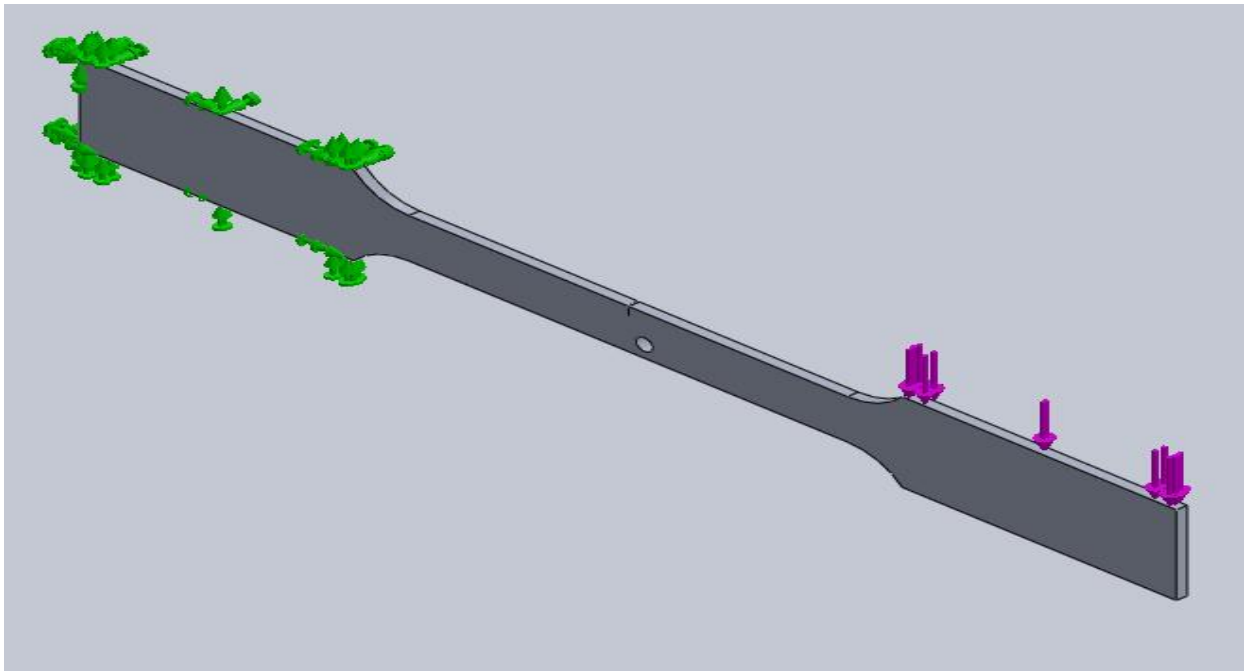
Showing Specimen 1 under transverse loading condition
